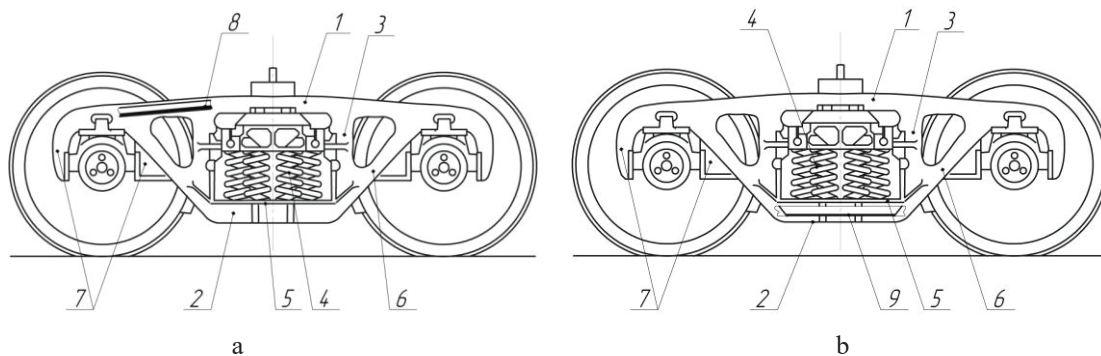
Pre-stressed side frame of three-piece bogie concept 1 - top sole bar member; 2 - lower sole bar member; 3 - vertical columns; 4 - spring opening; 5 - bearing surface; 6 - diagonal sole bar member; 7 - jaw pedestal; 8, 9 - rod
